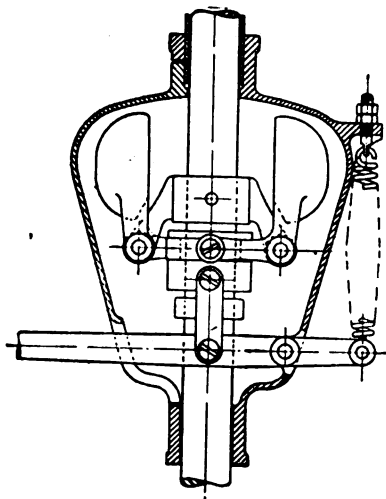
AUTOMATIC GOVERNOR OF THE FLY BALL TYPE, HAVING OUTSIDE ADJUSTMENT
